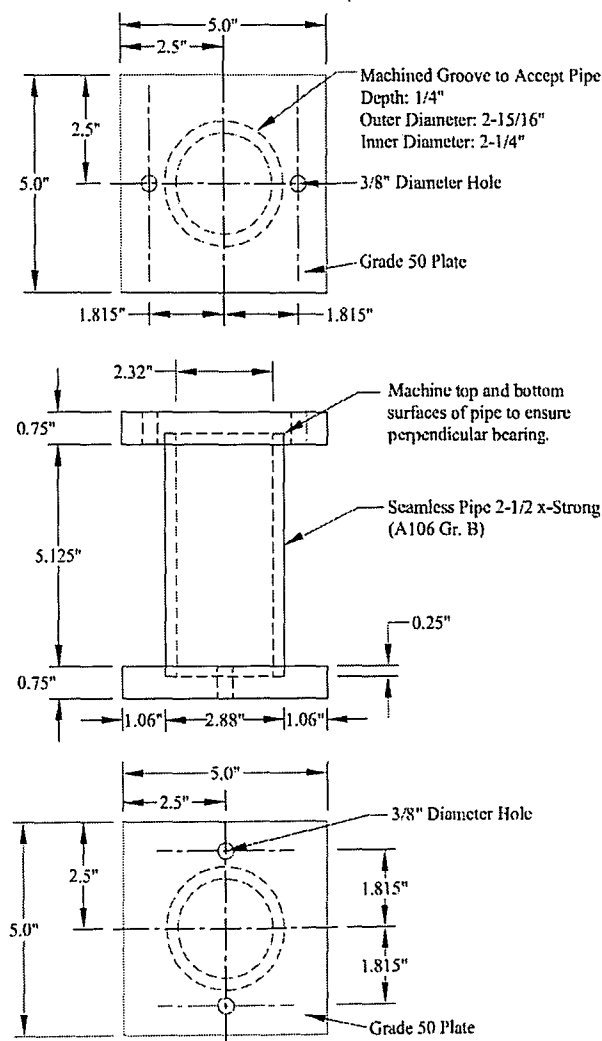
Detailed Drawing of Load Cell and Support Plates
